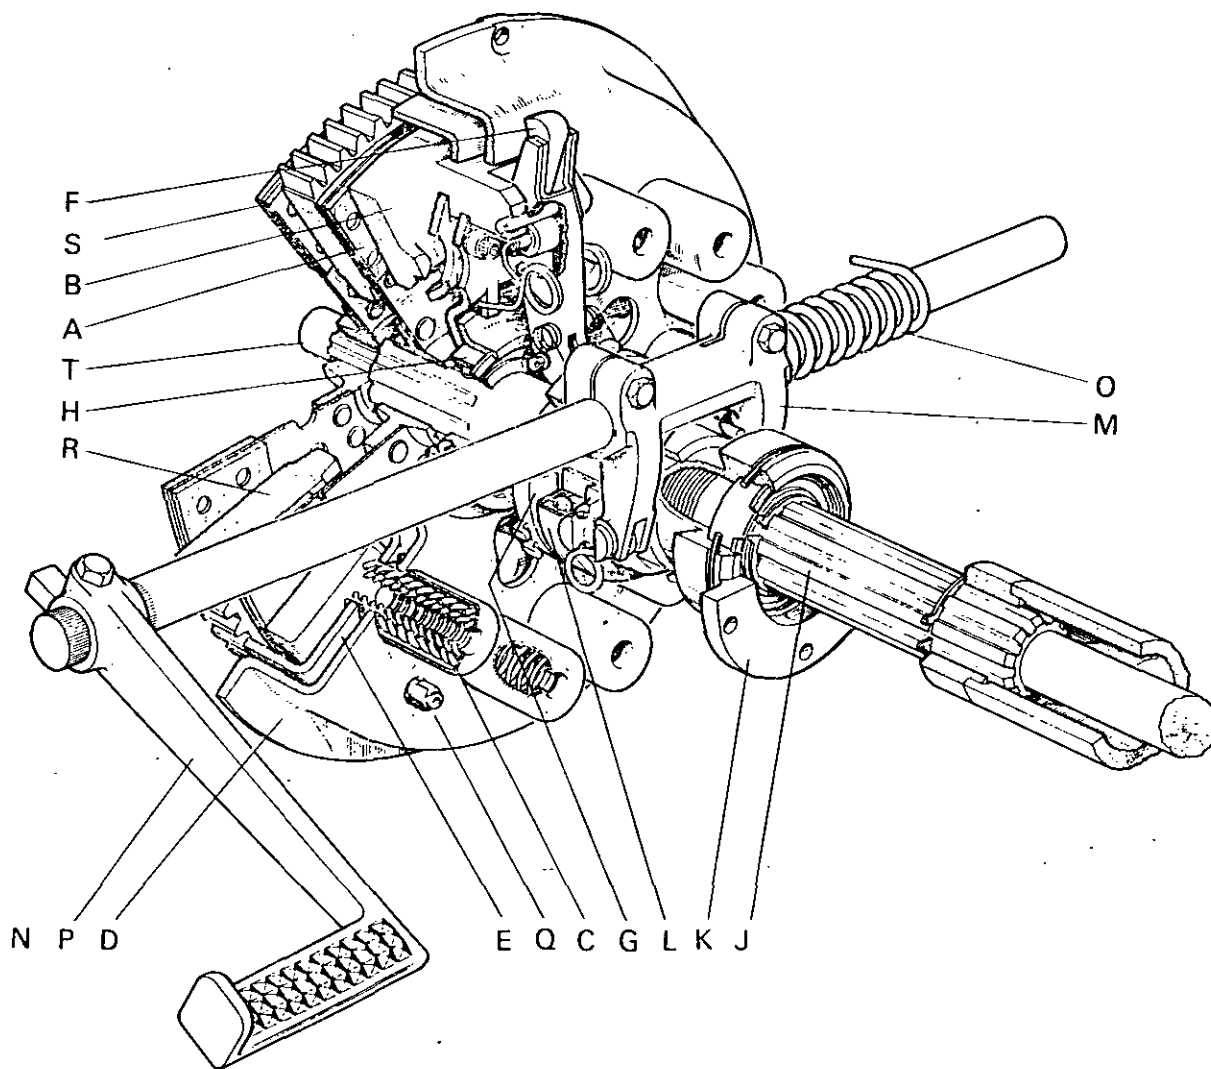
DOUBLE CLUTCH — 770 TRACTOR
